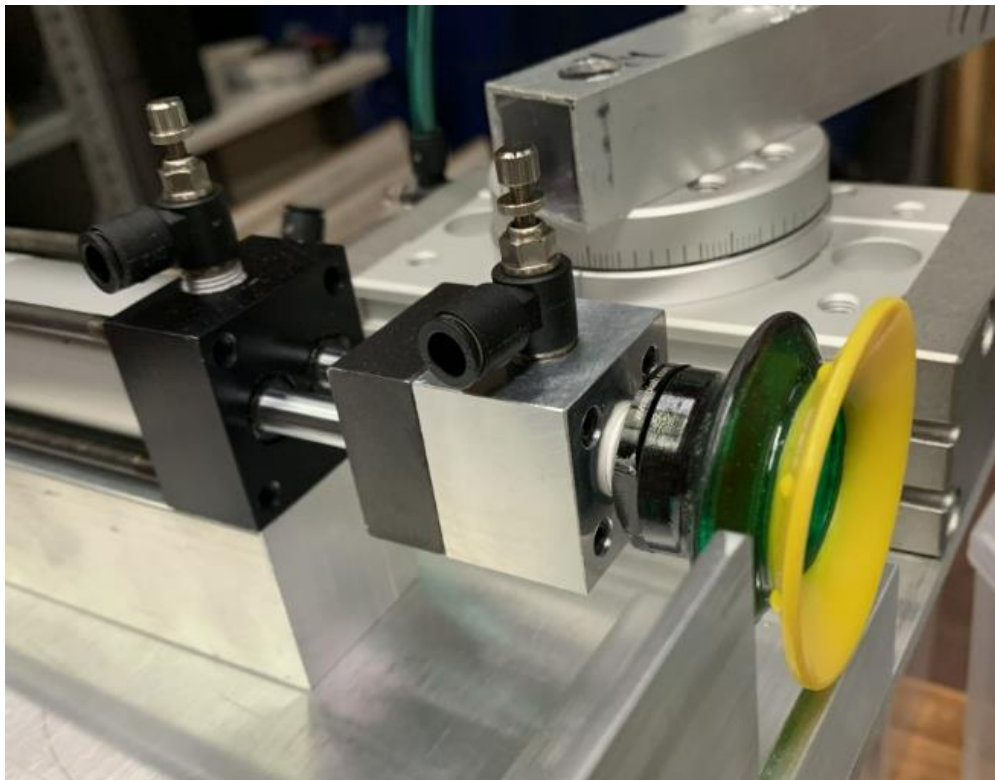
Custom T-fitting connecting the air cylinder, suction cup, and air intake
